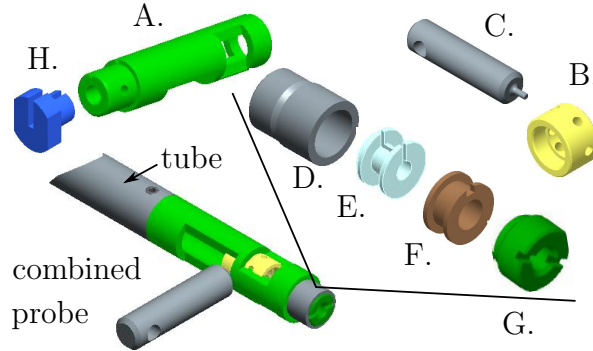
Manufactured probe for magneto-PL measurements in pulsed magnetic fields. A cylinder body A houses two lens holders B, which can be moved with the tool C. Part D is built to hold the heater E and the pick-up F and can be attached to the body A and sealed with the part G. On the other side, a fiber ferrule holder H can be screwed into the cylinder. The body A is connected to a stainless steel tube with two grub screws.
